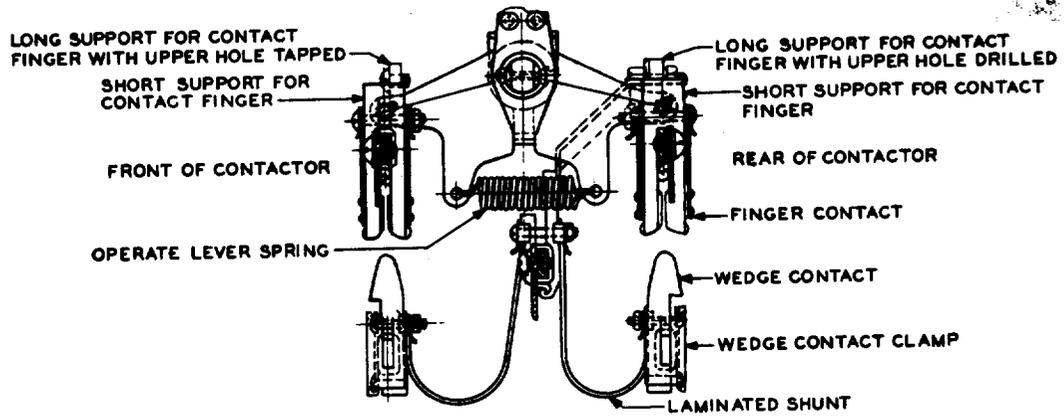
Parallel-type Contactor Mechanism on Form K19 Starter
